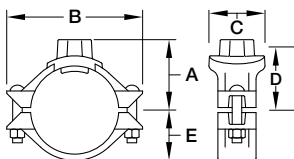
MECHANICAL TEE THREADED OUTLET
